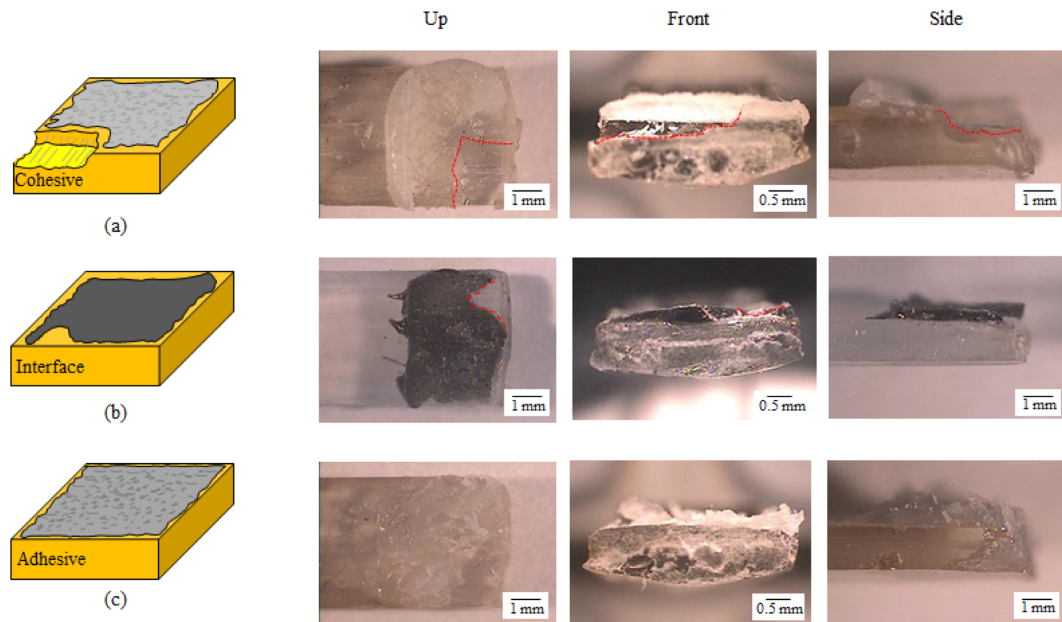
Fracture surfaces: (a) epoxy adhesive, (b) epoxy adhesive and CNT, (c) acrylic adhesive
